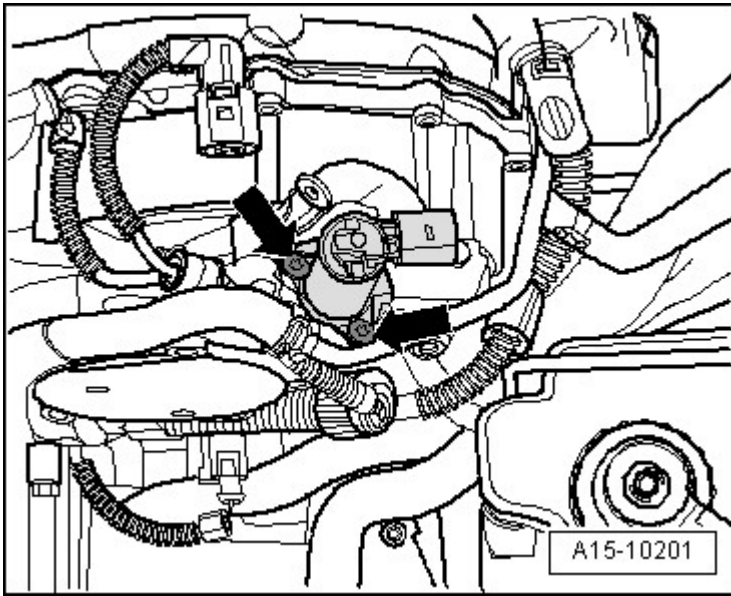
Identifying Camshaft Adjustment Valve 1 N205 Bolts
